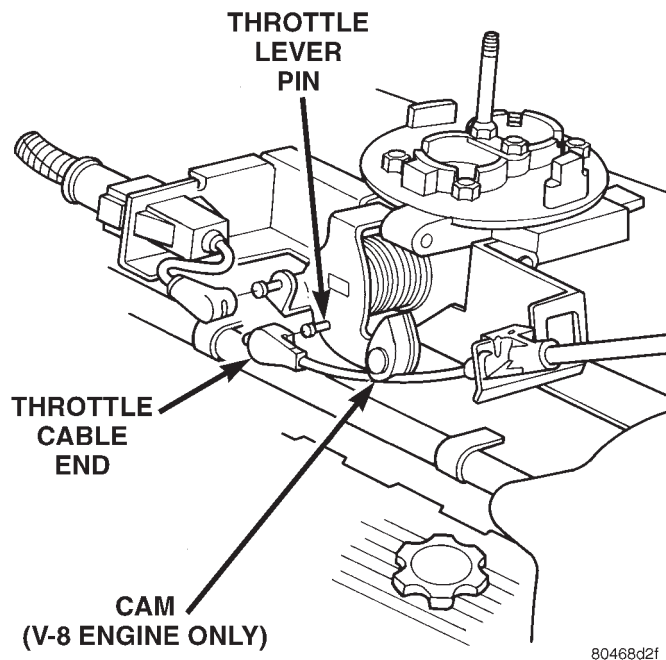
Throttle Cable at Throttle Body—5.2L/5.9L V-8 Engines
